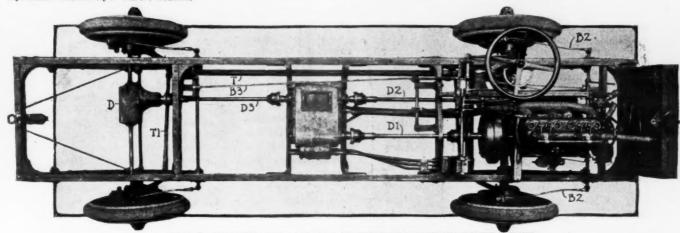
CHASSIS VIEW OF THE JEFFERY FOUR-WHEEL-DRIVE TRUCK Plan of Jeffery chassis, showing how the power is transmitted from the motor through the main driving shaft D1 to the gearset, thence to the differential on the front axle through the shaft D2 and to the differential D on the rear-axle through the shaft D3. Likewise the steering of the rear wheels is effected through the longitudinal tube T to the cross arm T1. Braking on the rear wheels is accomplised through the rod B3 and on the front wheels through the two rods B2
